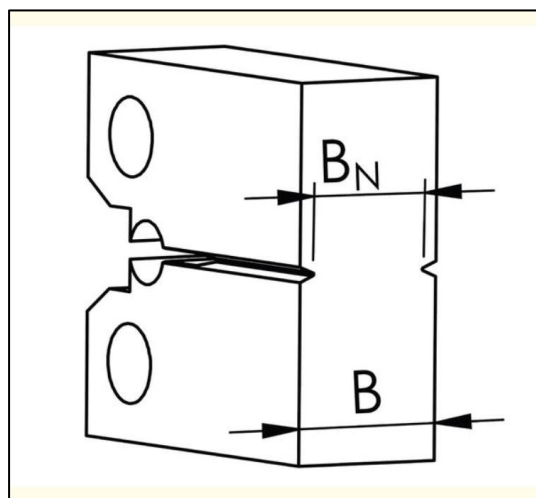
Compact Tension Test Specimen with Side Groove [5]
